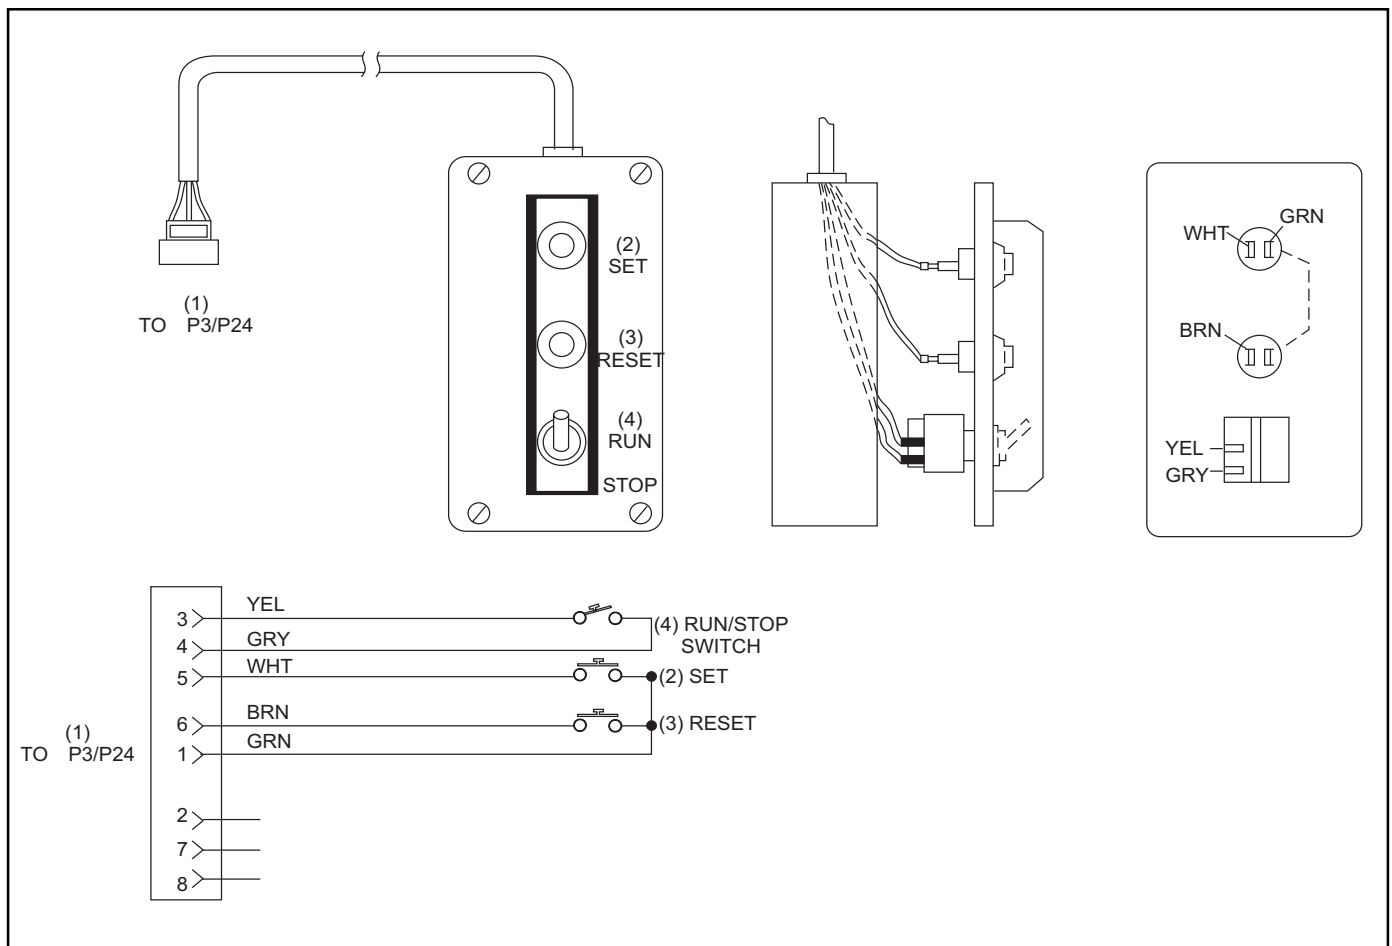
Rear Control Box Cable Assembly (Part No. 47-245422-003 or 47-240071-004)
